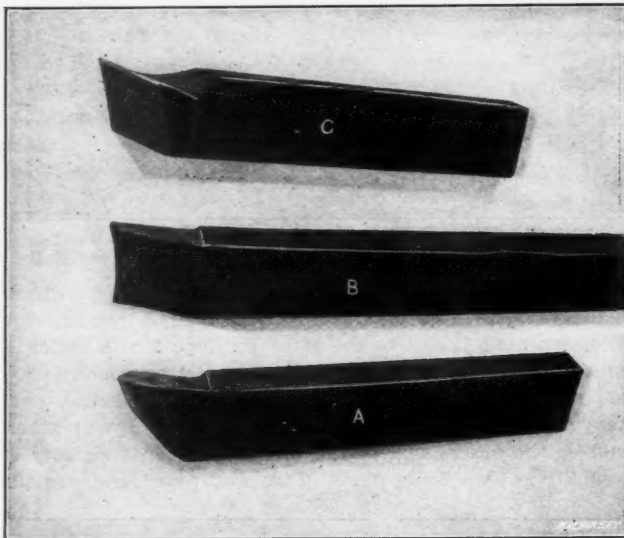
Types of Shaft-turning Tools—made of High-grade, High-speed Tool Steel
